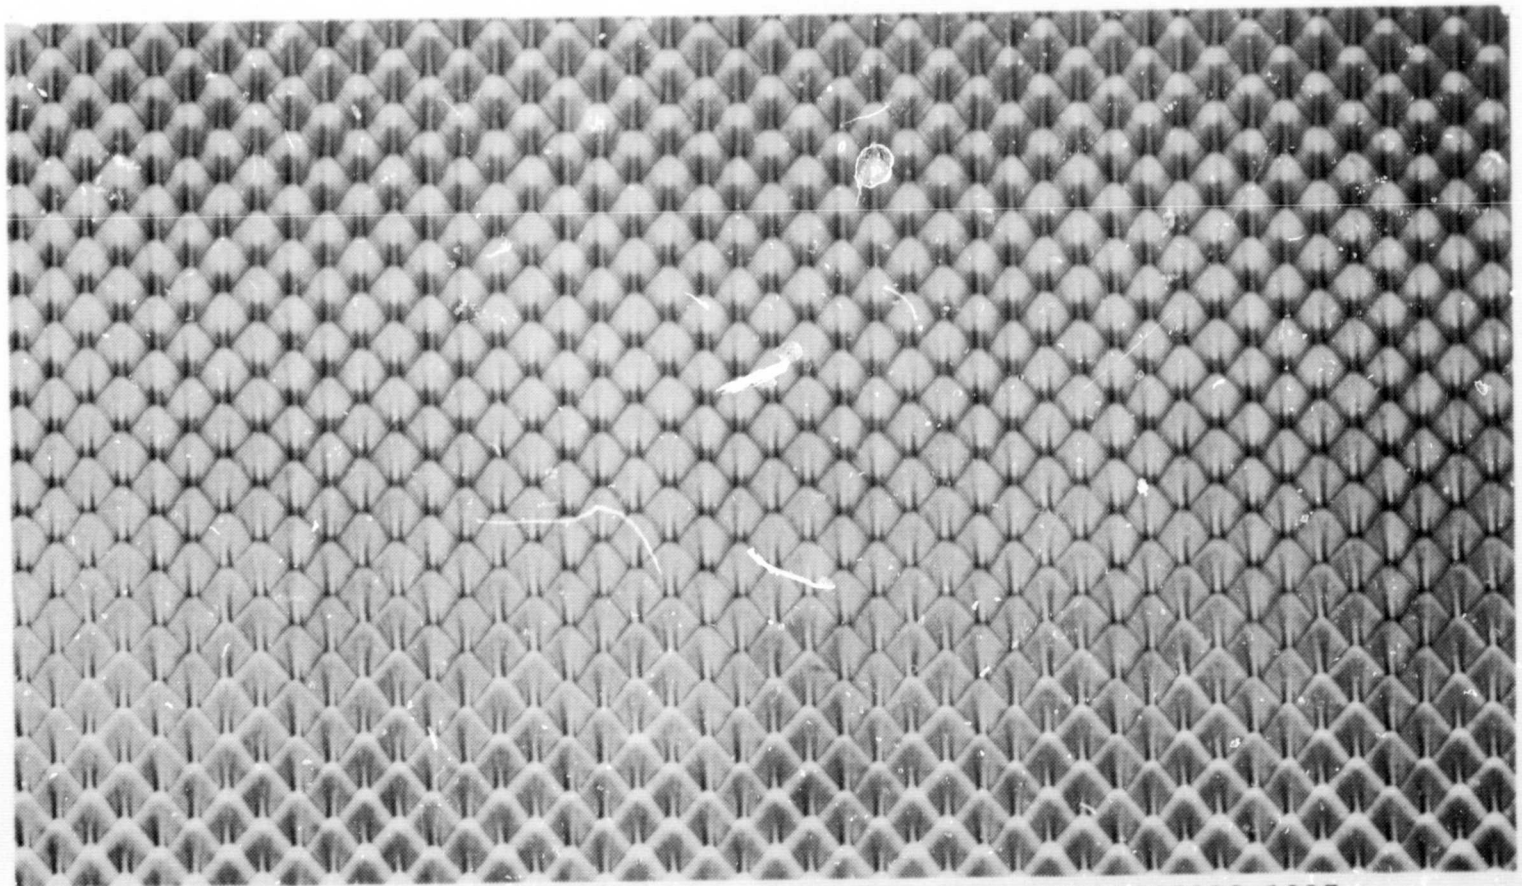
Typical x-ray view of honeycomb panel L9000002-1003 - bottom surface.
